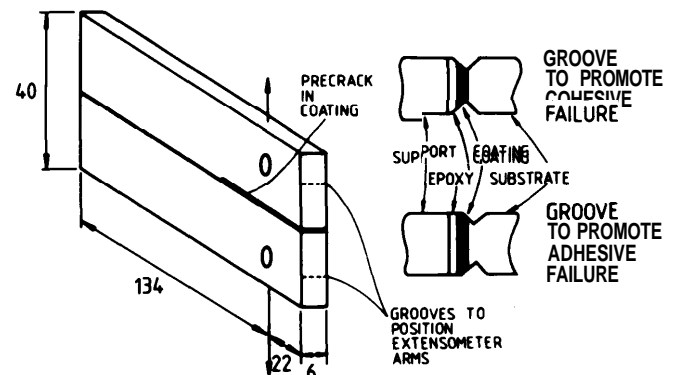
CONFIGURATION OF DOUBLE CANTILEVER BEAM COMPOSITE SPECIMEN
